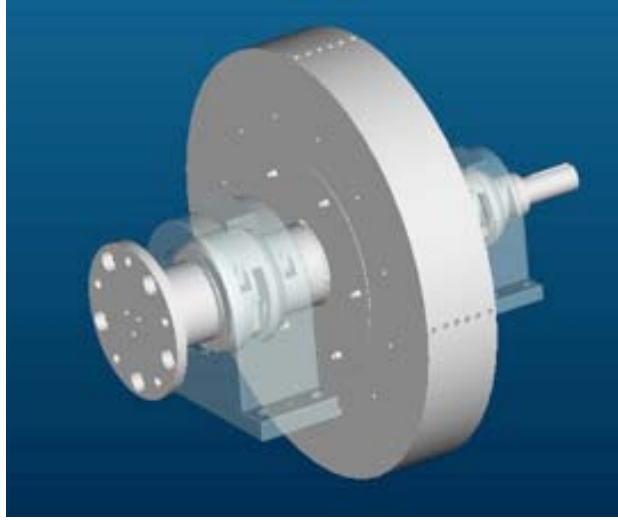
Flywheel Assembly Drawing (From: CEM)
